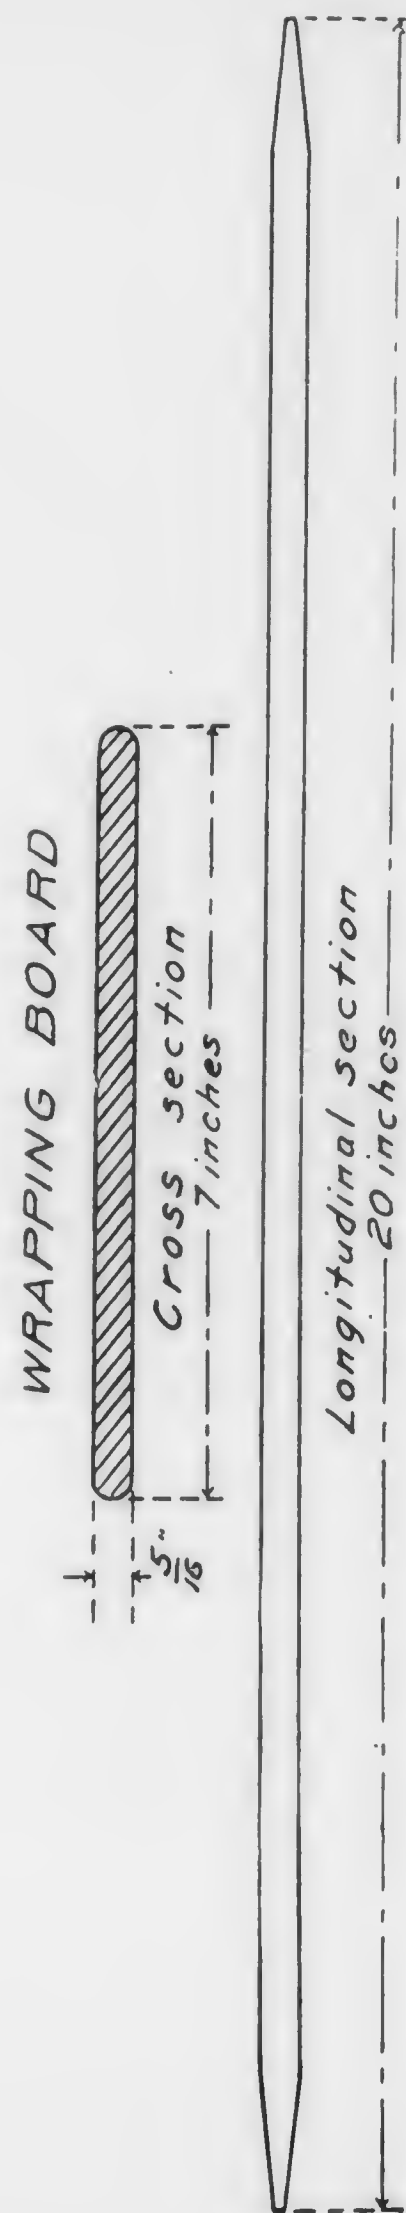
Drawing showing standard dimensions of a wrapping board.
